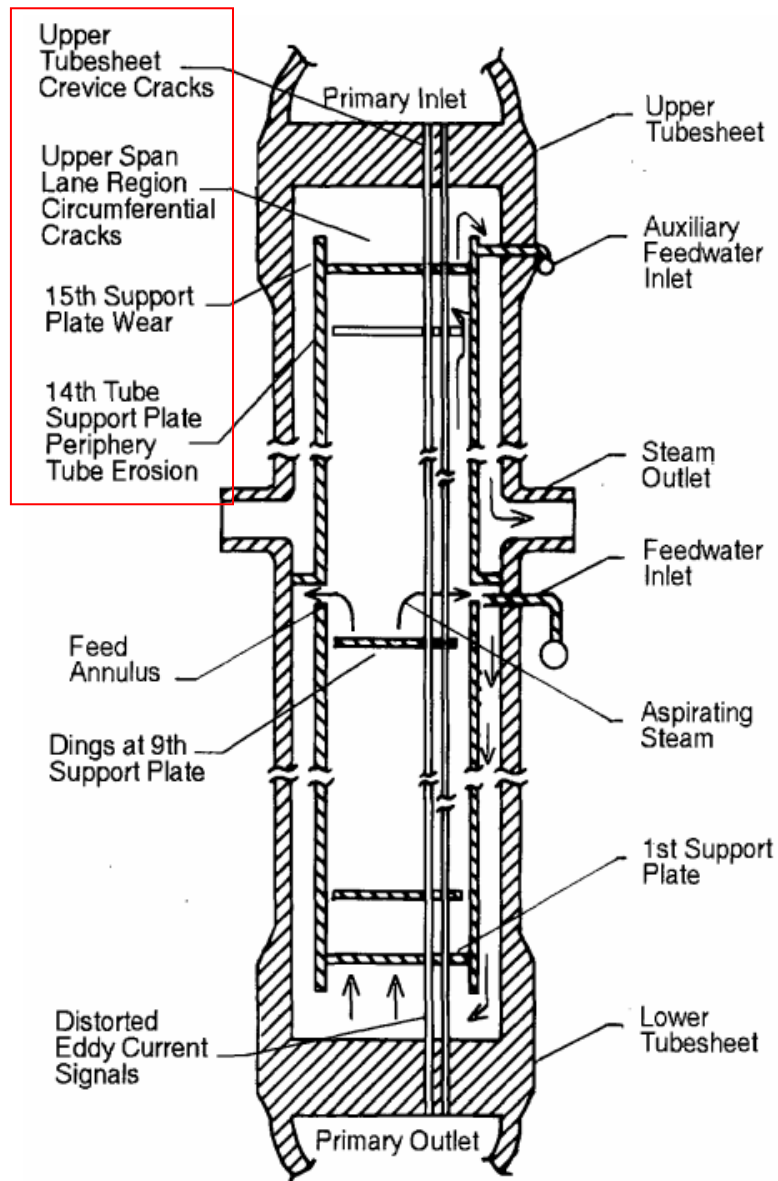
Schematic of tube degradation mechanisms in OTSGs [24]
